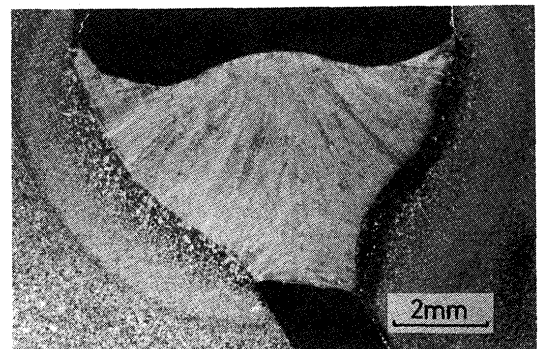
Recrystallized macrostructure in controlled restraint fillet weld cracking test of HT50
